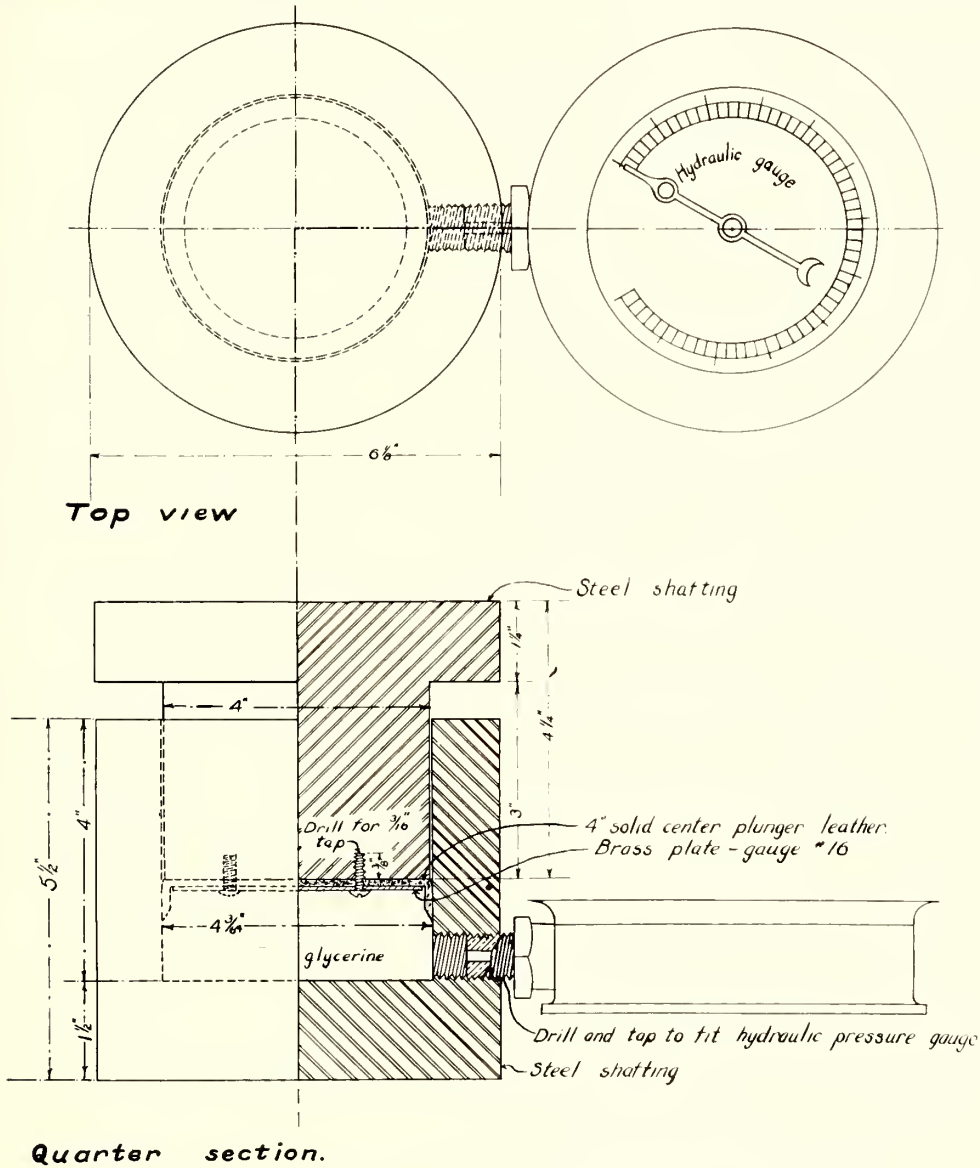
Detailed drawing of compressometer; used to measure loads applied by jackscrews.
